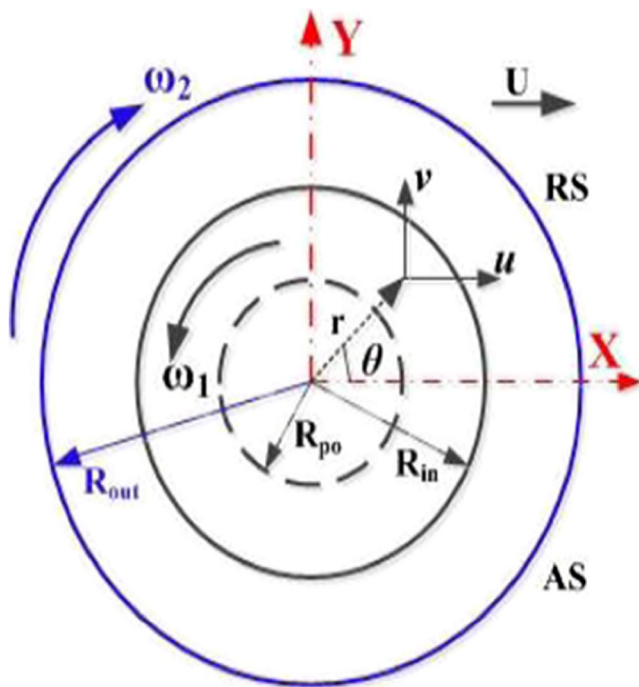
A schematic illustration of tool-workpiece contact interfaces at tool shoulder
